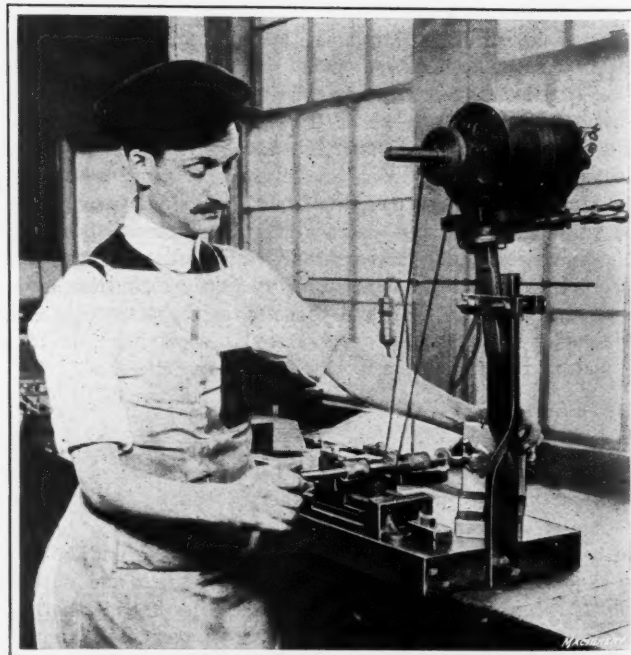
Simple Method of grinding Gaging Blocks which proved Effective
